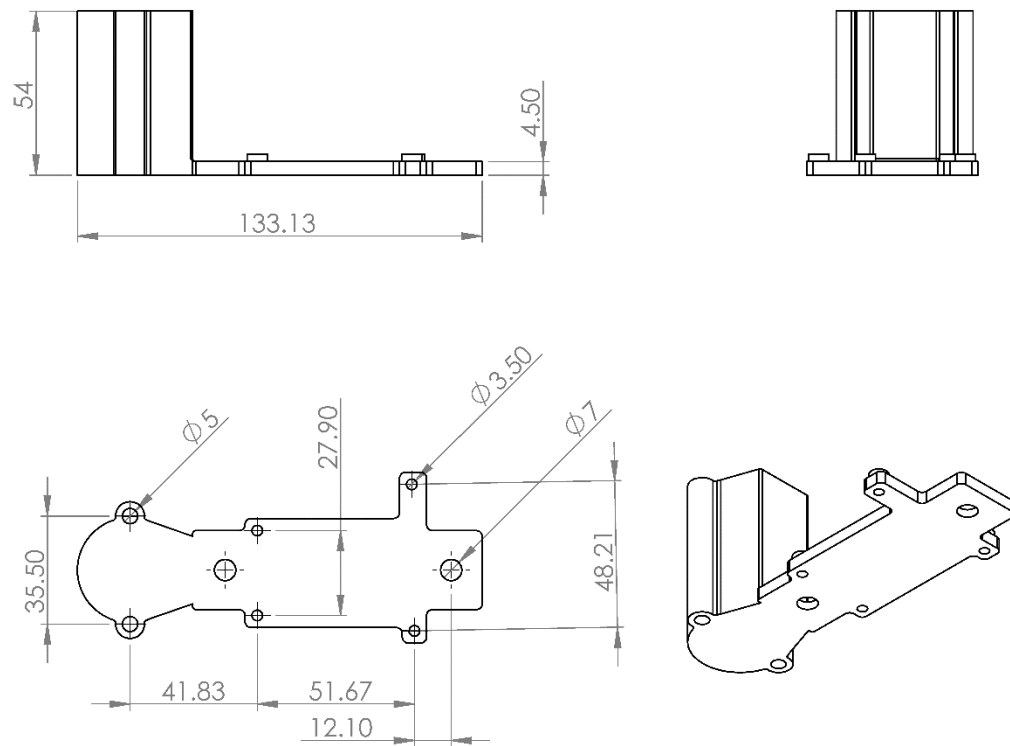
3D-printed holder for Arduino and step motor base (unit: mm)
